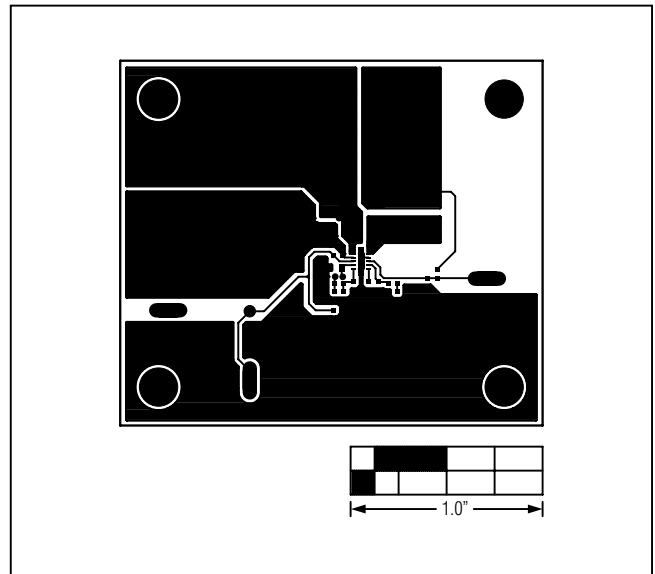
MAX17501H EV Kit PCB Layout—Component Side
